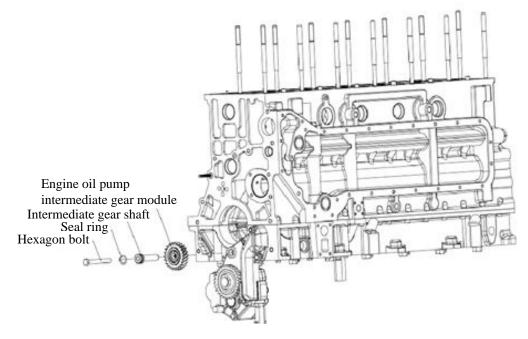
Exploded view of engine oil pump intermediate gear
